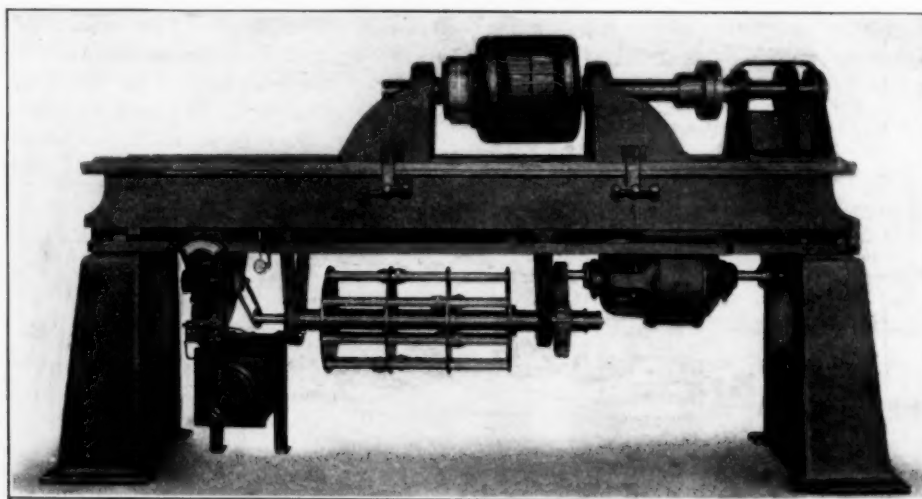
DYNAMIC BALANCING MACHINE, TESTING ARMATURE
